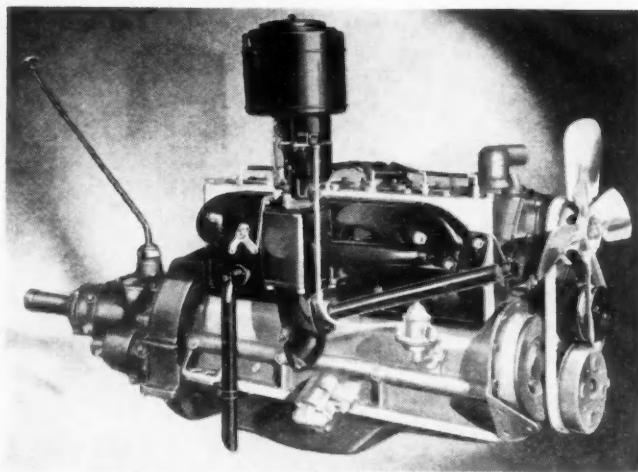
Pontiac Engine with Bottom Flange and Heavy Oil Duct Running Lengthwise of Crankcase
